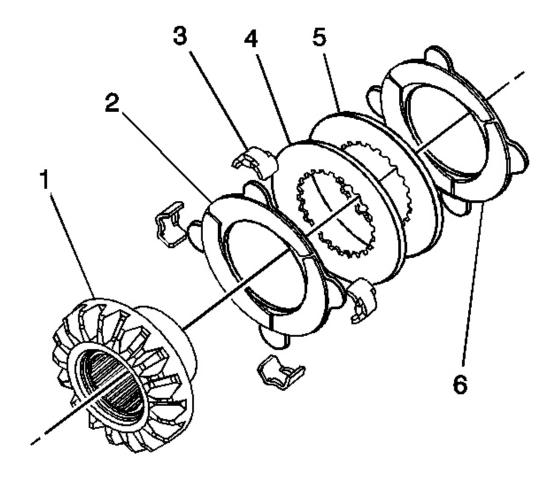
View Of Locking Differential Clutch Disc Assembly (9.5 Inch Axle) Courtesy of GENERAL MOTORS CORP.
